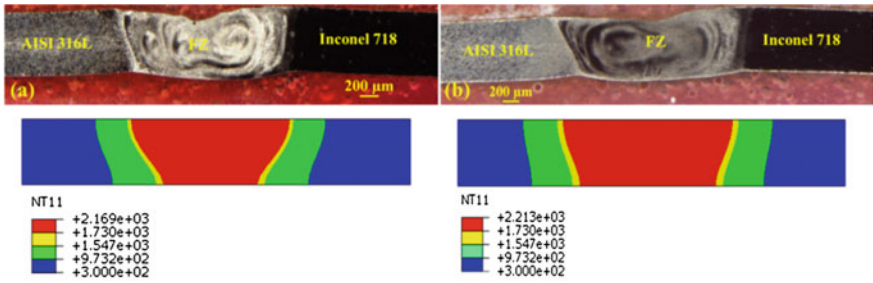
Comparison of weld macrograph for a S1 and b S2 welding condition
